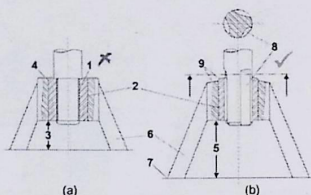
(a) Cleaning may be impeded due to too tight clearance (1) in the foot bearing itself (2), and due to too little clearance between it and the base (3). Horizontal ledges (4) where product may accumulate or where liquids are not allowed to drain must be avoided. (b) The foot bearing is now mounted clear of the bottom of the vessel (5), allowing free flow of product and cleaning solution around it. Bearing pedestal support members (6) should preferably be made of solid construction. Hollow constructions are not recommended, but if used, they shall be of sealed (welded) construction, inspected for integrity. Round legs are preferred over flat members, even if the latter are radiused. The legs should be flush welded in place to the tank bottom (7). All welds must be ground and polished to blend smoothly with the adjacent surfaces. The agitator shaft is provided with grooves (8) in the bearing area to facilitate both lubrication by fluid products and cleaning. Sloped and radiused surfaces (9) reduce the probability of debris getting lodged on the top of the foot bearing and allow for proper drainage of liquids (e.g. cleaning solution) (CFRCRA, 1997; Lelieveld et al., 2003; Hauser et al., 2004b; ASME, 2009).
